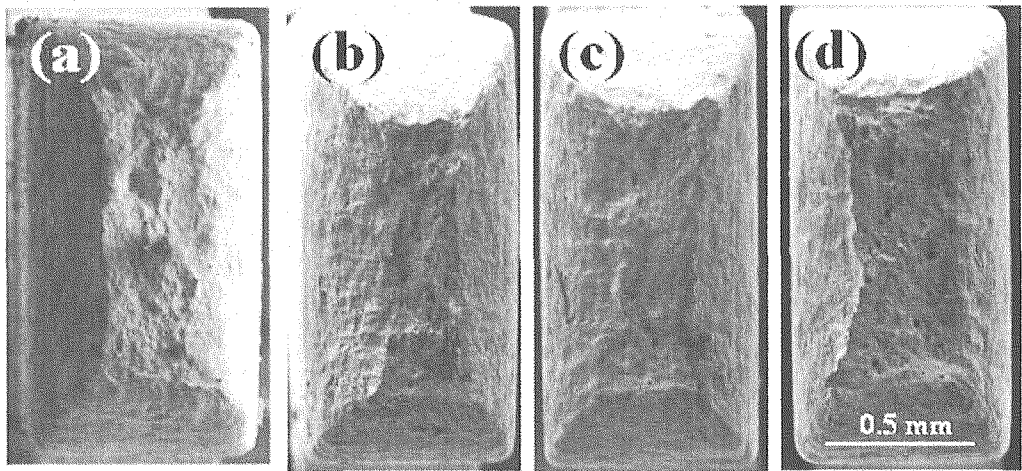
Fracture surfaces of (a) F82H, (b) F82H+60ppm¹¹B, (c) F82H+30ppm(¹⁰B+¹¹B) and (d) F82H+60ppm¹⁰B steels after the tensile testing.
